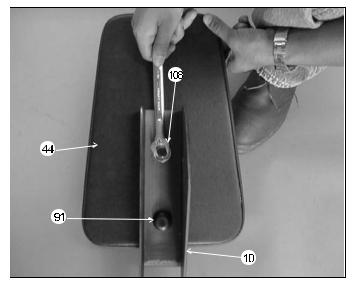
Mount the Back Pad Adj Bracket (#10) to the Bench Press Back Pad (#44) and secure using two Hex Head Cap Screws 3/8-16 X 1 (#81), two Bumper Washers 3/8 (#108) and two Bumper Caps Black (#91). Refer to the Exploded View on page 19 for further clarification of this assembly.
